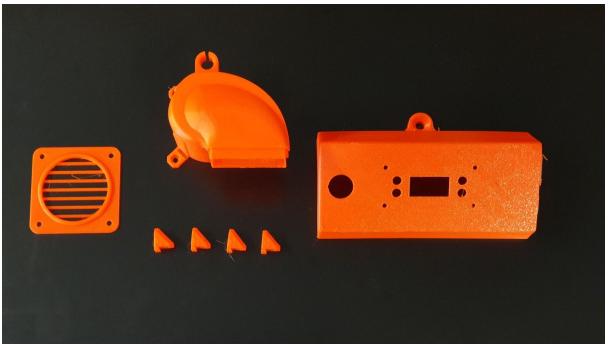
The printed parts for the example enclosure, Top Cover, Fan outlet, corner #3 and Screen\_cover
